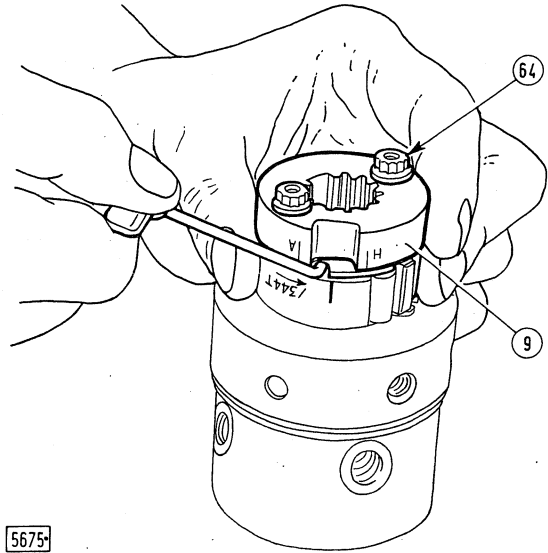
Arrangement of the adjusting plates with respect to the rotor assembly mark.
